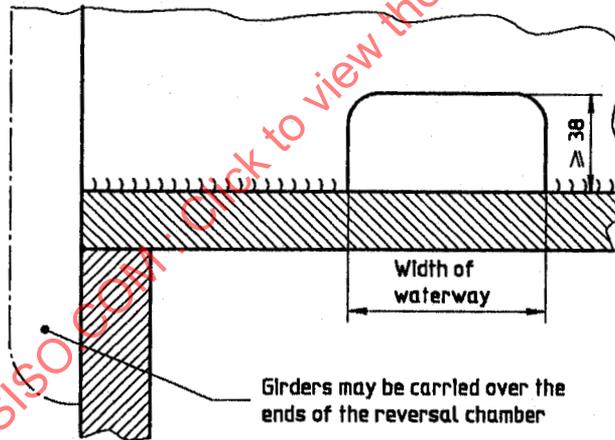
Permitted weld details of reversal chamber bar stays
